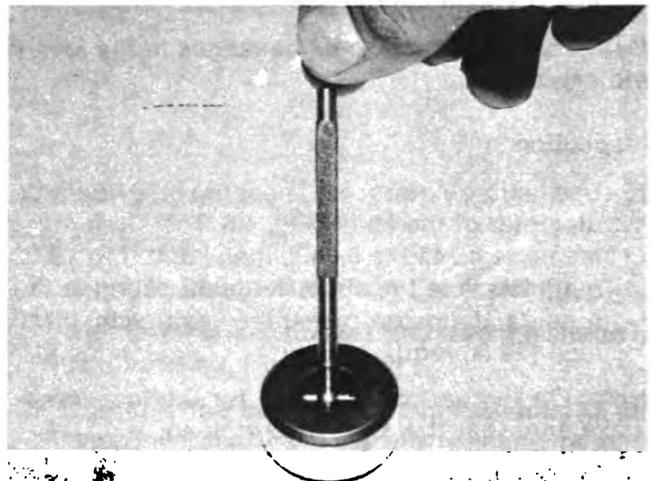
(N10414). Measure The I.D. Of The Cam Roller.
